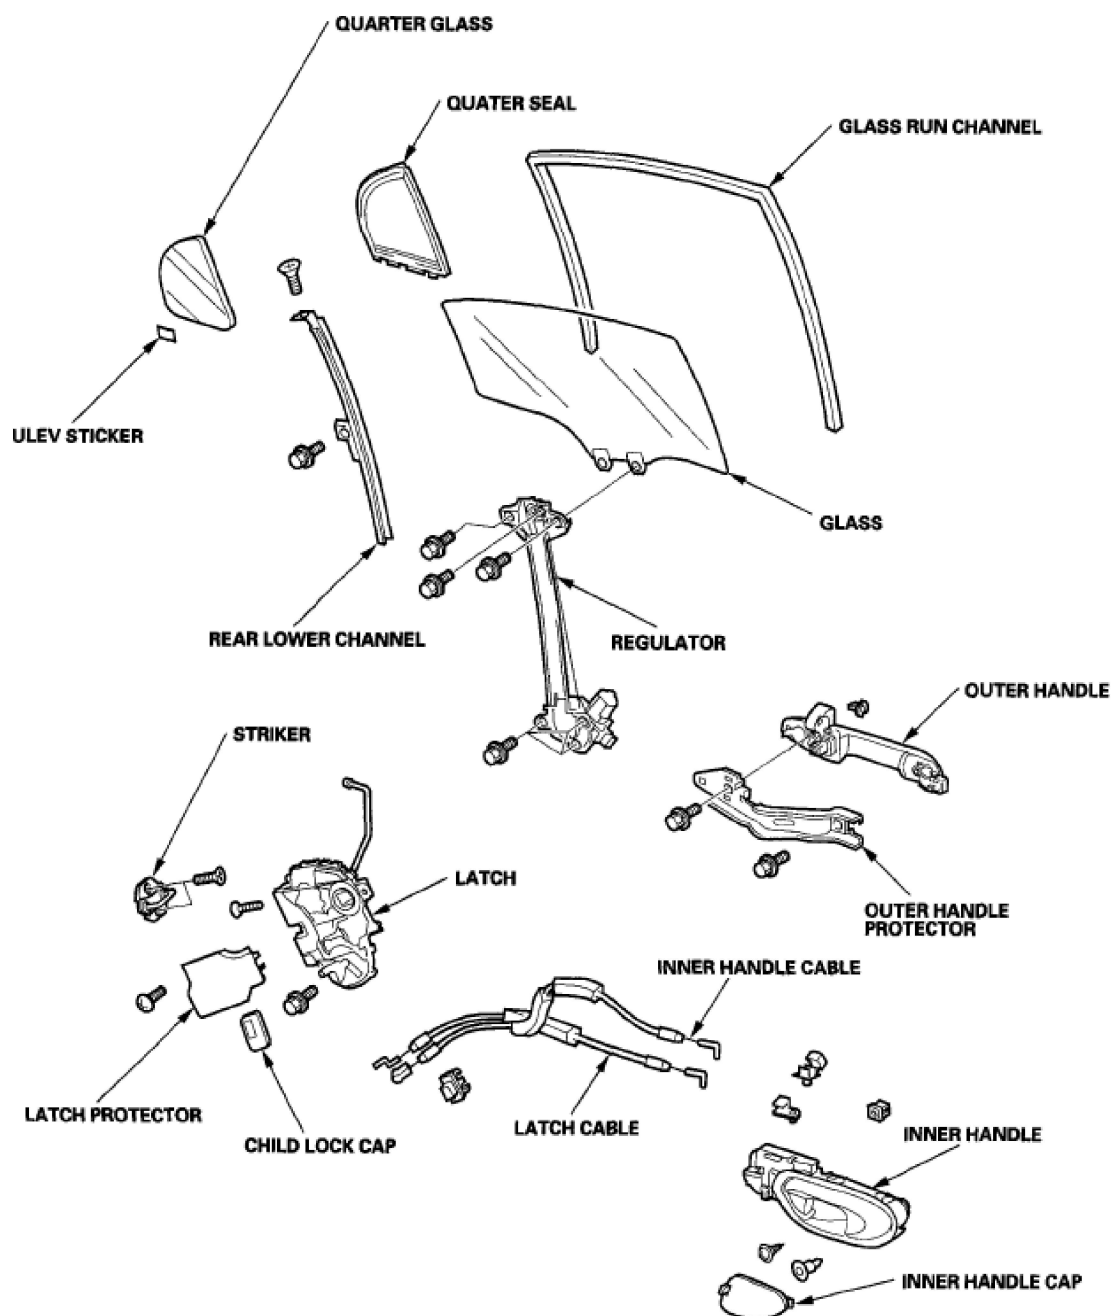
Exploded View Of Rear Door (4-Door - 2 Of 2)
